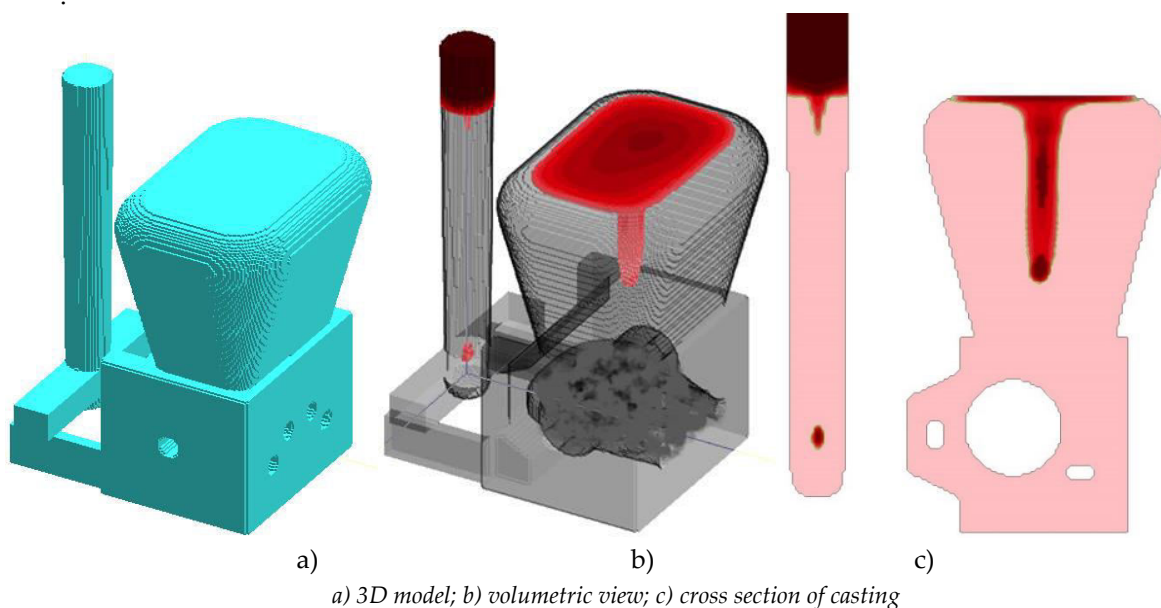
Casting with a gating system and the results of modeling the formation of shrinkage defects in the casting body
